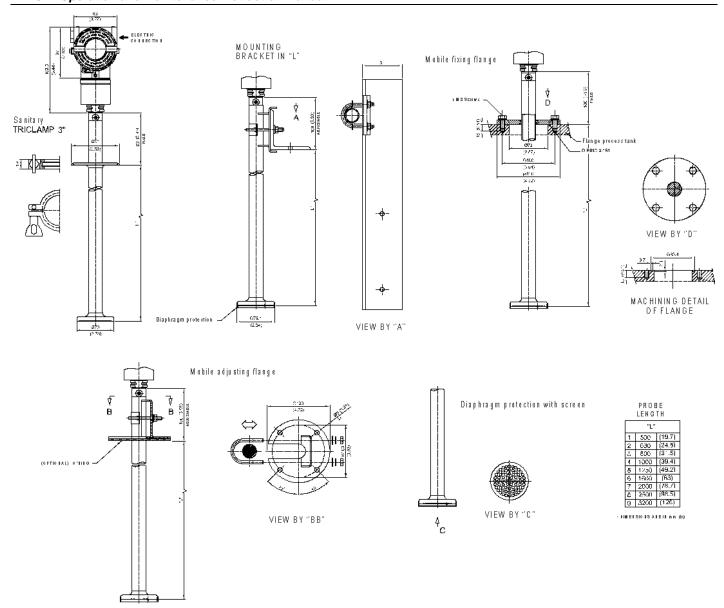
(e) – Dimensional Drawing and Mounting Position for LD291 – Level (Insertion)
